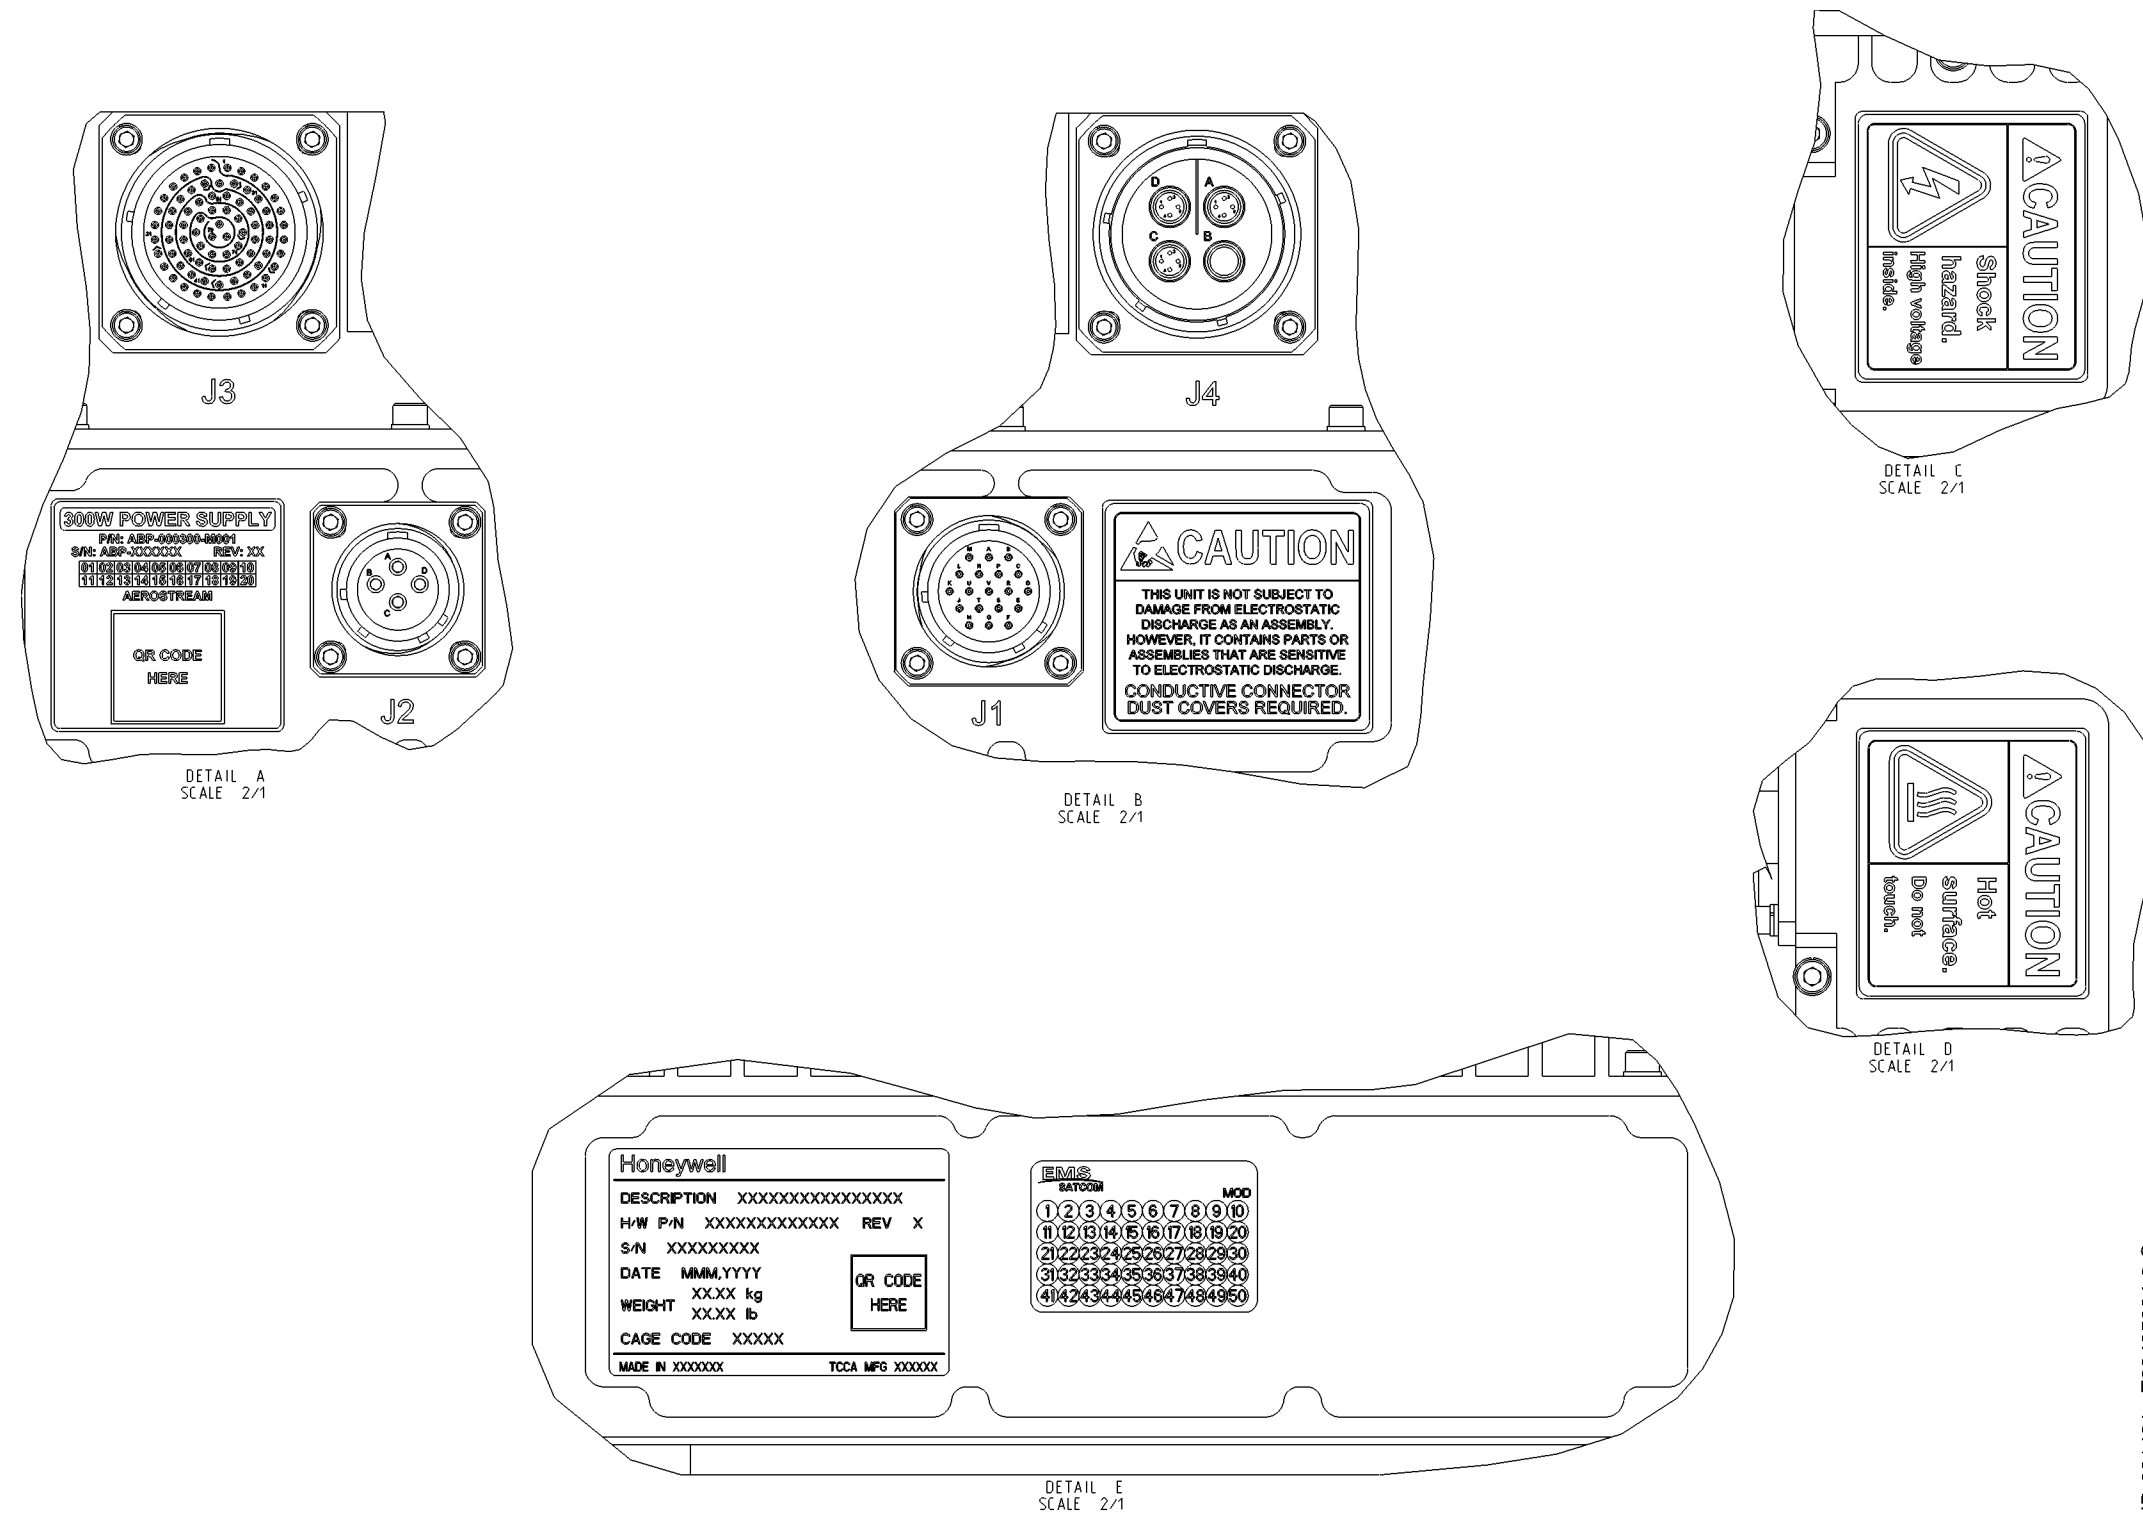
(Sheet 3 of 3) KANDU Variant 2 Outline and Installation Drawing (90405004, REV C)
